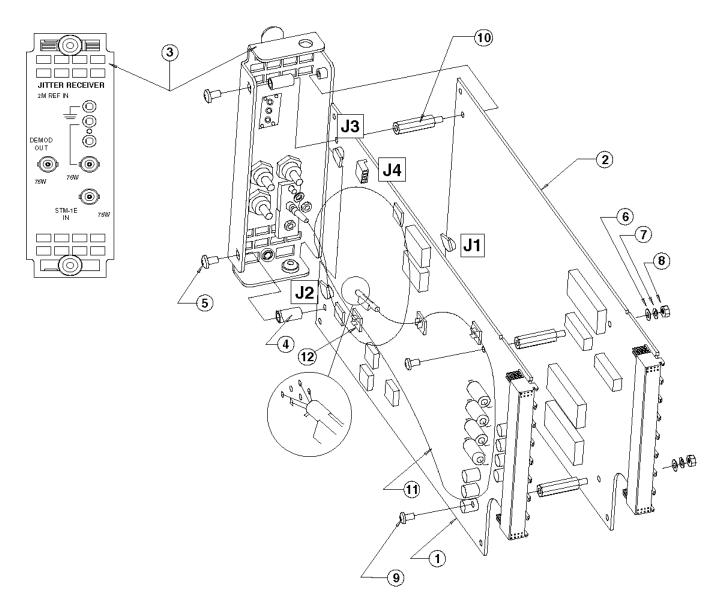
Option A1P STM1/4 - e/o Jitter Rx Module - Exploded View
